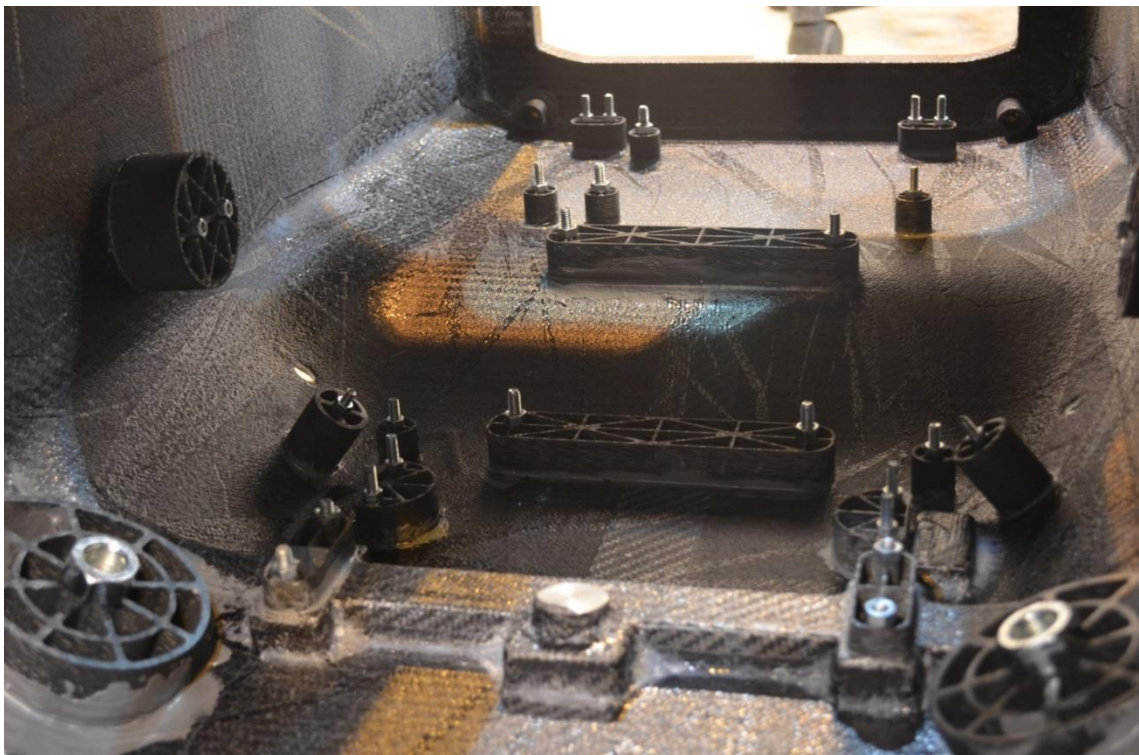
Bonding inserts to the outer facesheet in the front end of the monocoque
